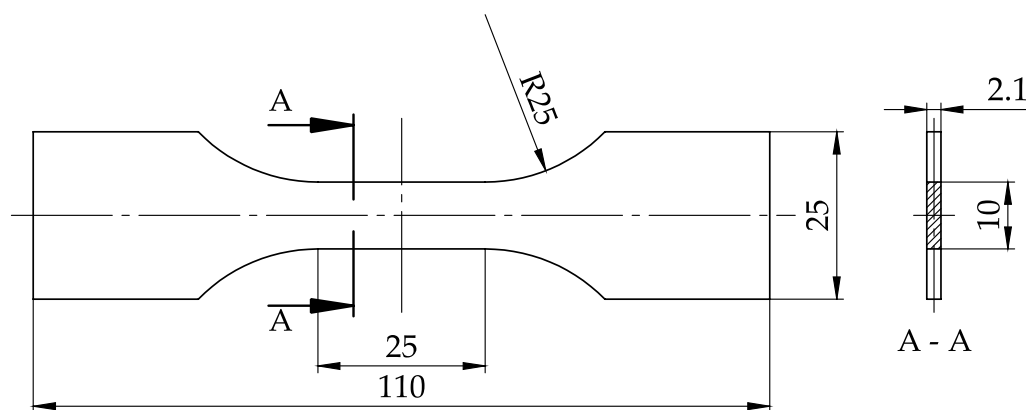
Technical drawing of specimen for fatigue tests, measurements in mm.
